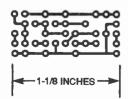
If you plan on using a PC board to build the Preamp, use this full-size template to etch your own.
